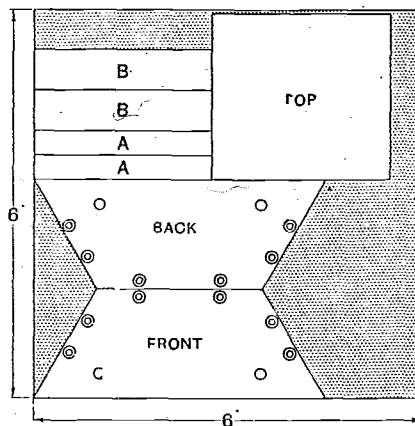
The ebonite parts are cut from a sheet as indicated here. Pieces A and B are marked in fig. 2.
